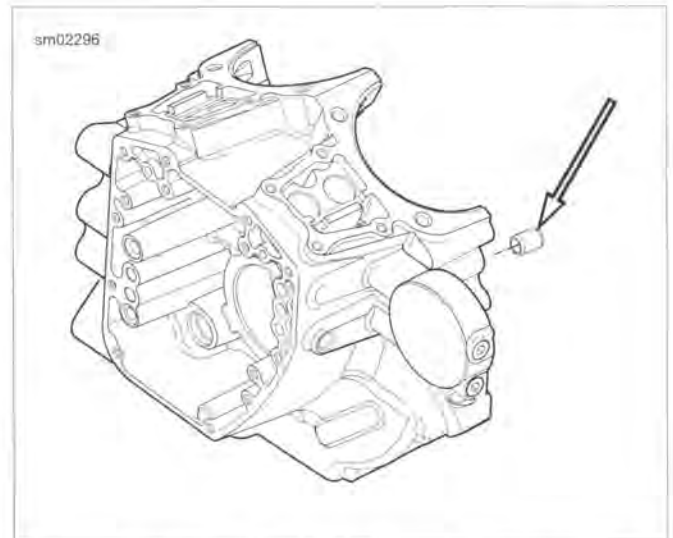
Right Crankcase Forward Dowel Pin (Rear Dowel Pin Not Shown)
